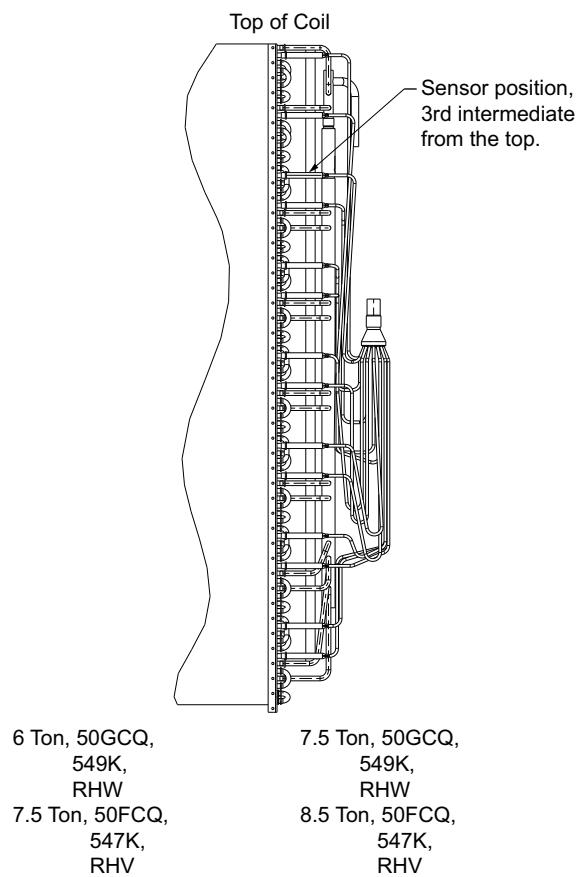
Cabinet A — Sensor Locations for Heat Pump Units
